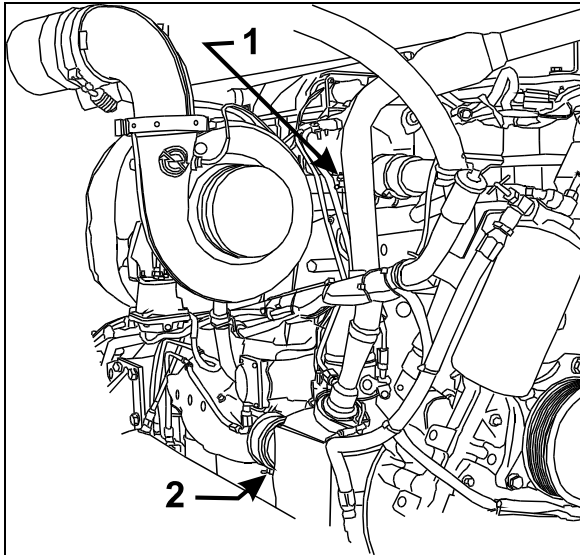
ENGINE COOLANT DRAIN COCKS 05088
